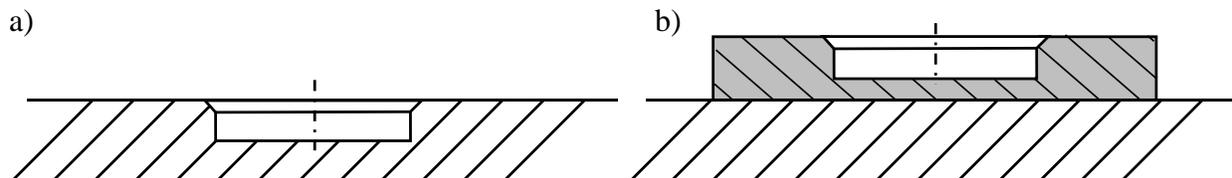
Concepts for placing milled parts into the additive manufacturing process with a) machined build platform insertion area and b) additive manufactured fixture to be placed on top of build platform.
